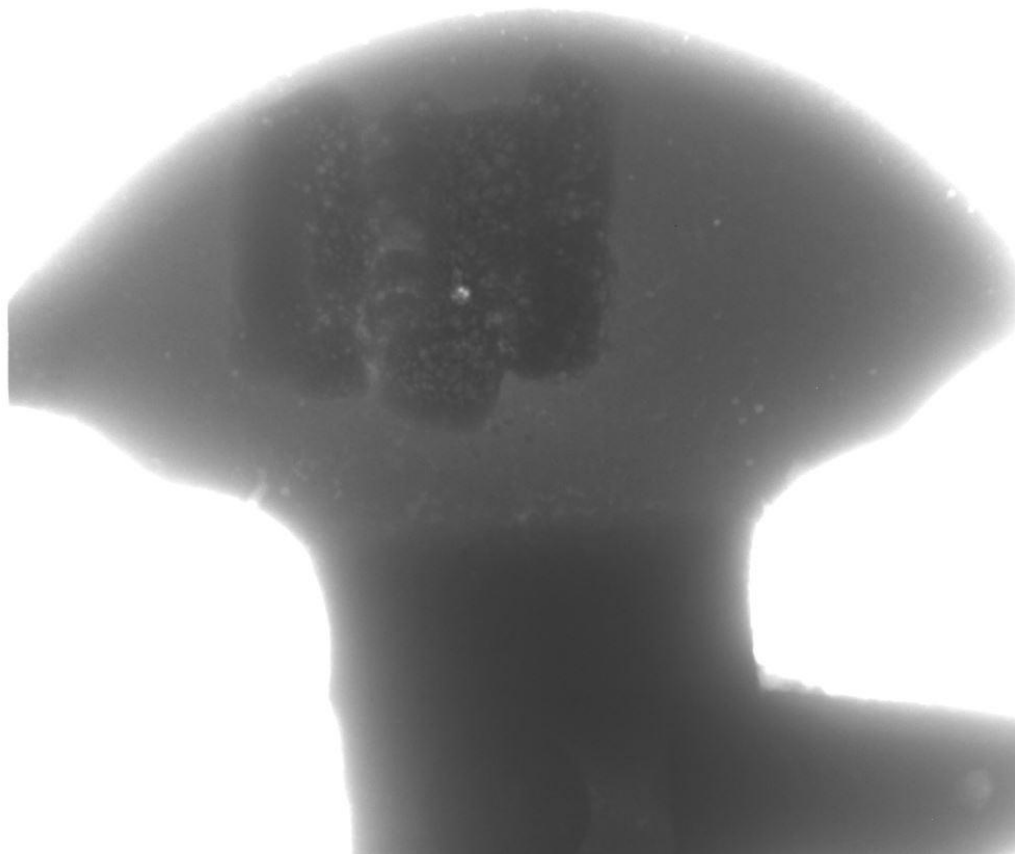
The blade X-ray for the weld-repaired testing axe.
